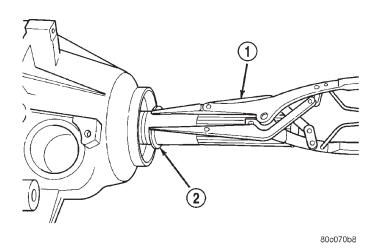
Rear Bearing I.D. Retaining Ring Removal 1 – SNAP RING PLIERS 2 – REAR BEARING I.D. RETAINING RING
